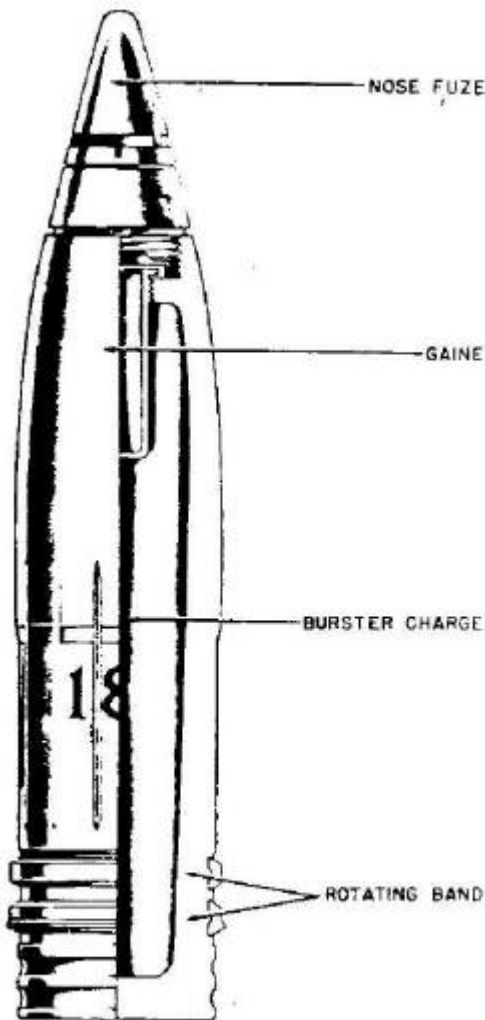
High Explosive Projectile for 88-mm A. A. Guns, 8.8-cm Sprgr. L/4.5 Zt.Z.
